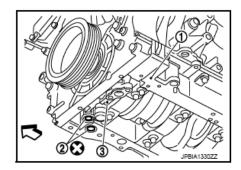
Identifying Lower Cylinder Block, Oil Pump And O-Rings Courtesy of NISSAN NORTH AMERICA, INC.
